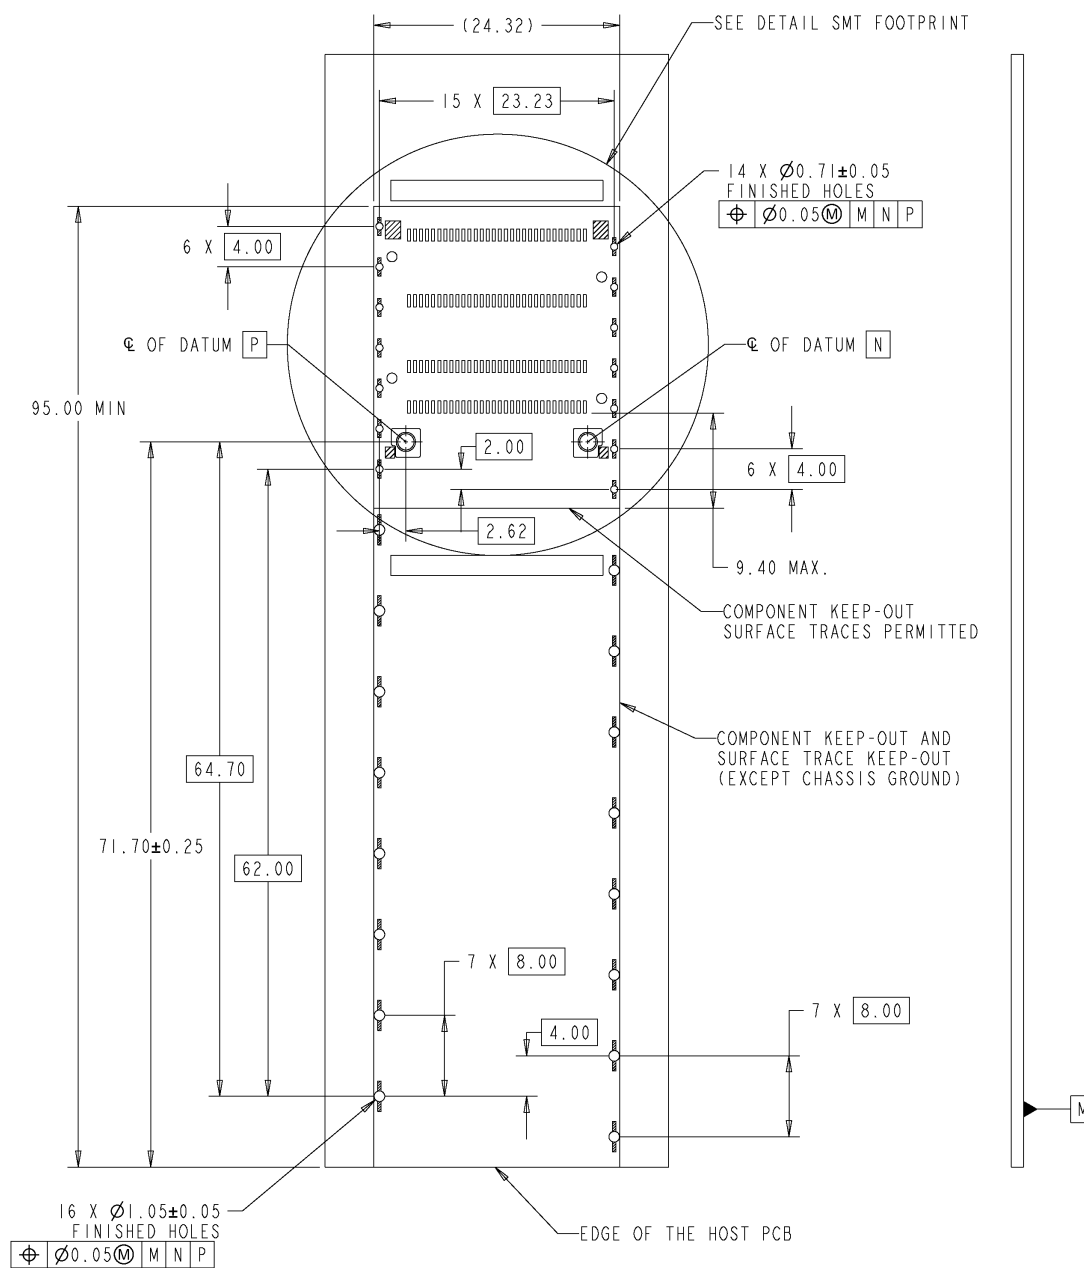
Host PCB Layout for 2x1 SMT cage
